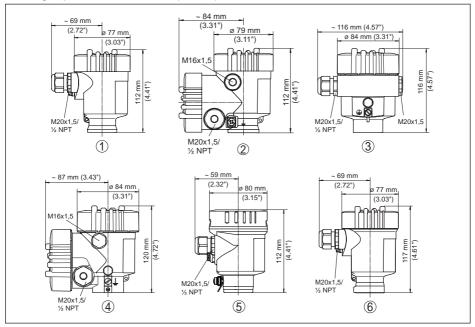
Housing versions with protection rating IP 66/IP 68 (0.2 bar), (with integrated display and adjustment module the housing is 9 mm/0.35 in higher, with metal housings 18 mm/0.71 in)
